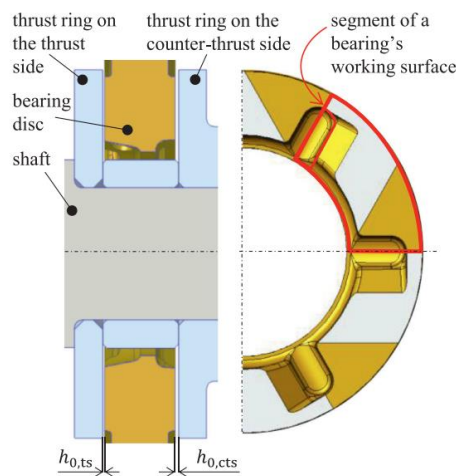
A cross section of the double-sided thrust bearing schematically showing the components and a segment of a bearing's working surface. The symbols $h_{0,ts}$ and $h_{0,cts}$ indicate the minimum thickness of the lubricating gap on the thrust and counter-thrust side, respectively [29].
